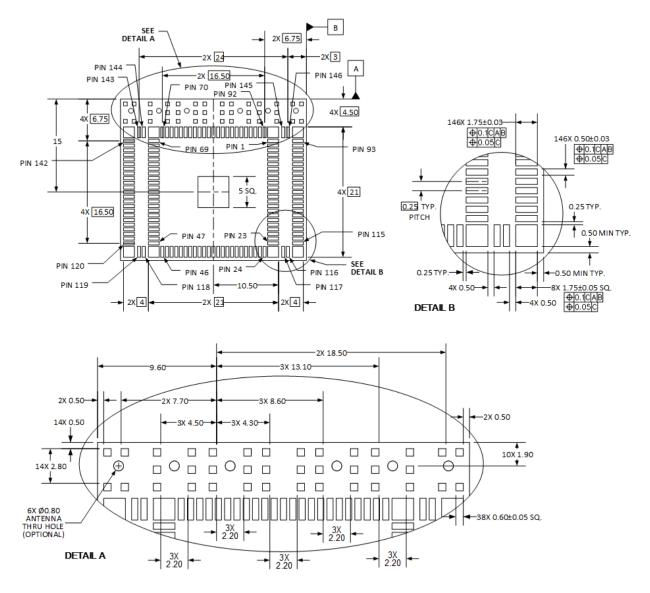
M.2 Type 3026-S3 Mechanical Outline Drawing Details Example
